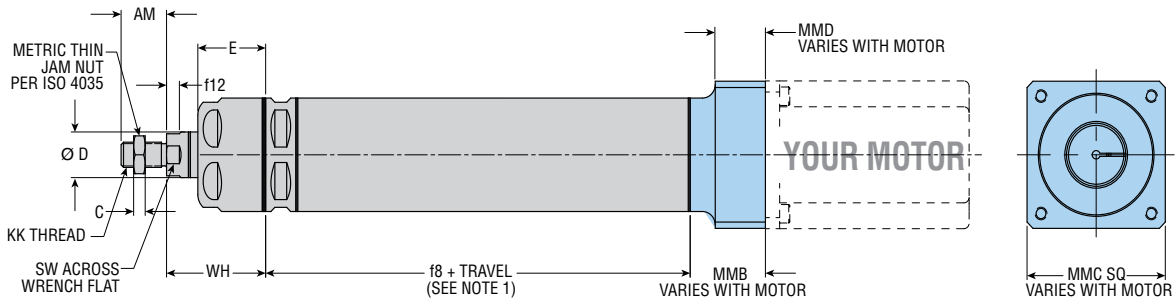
DETAIL FOR CUSTOMER-SUPPLIED MOUNTING OR FIXTURING
